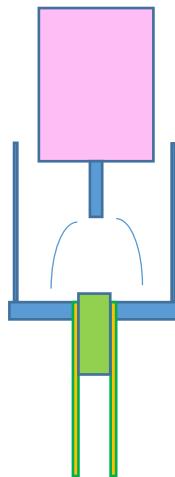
Schematic showing GTA torch and filler metal “plug” placement to make tube-to-hat spot weld.
